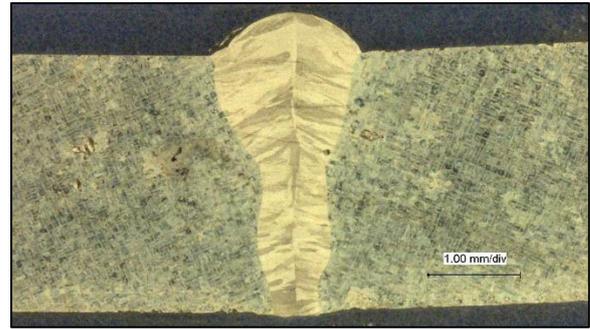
Laser welded bead cross section in 3mm sheet
